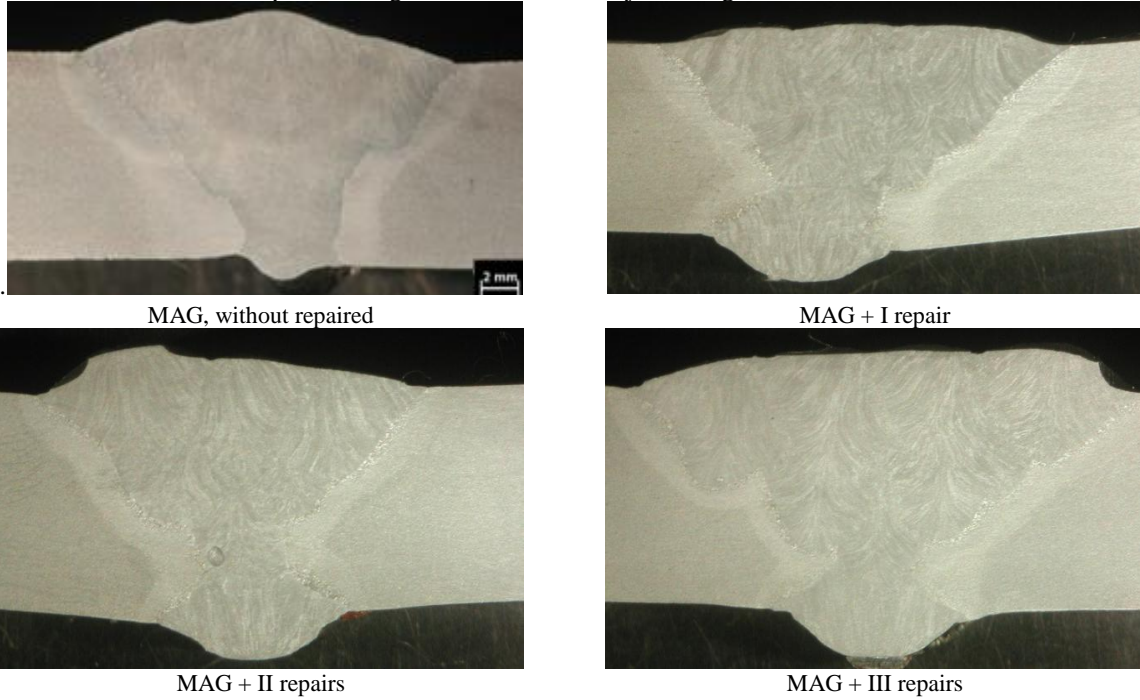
Macrostructure of S700MC steel MAG welded joints, etching: Adler
